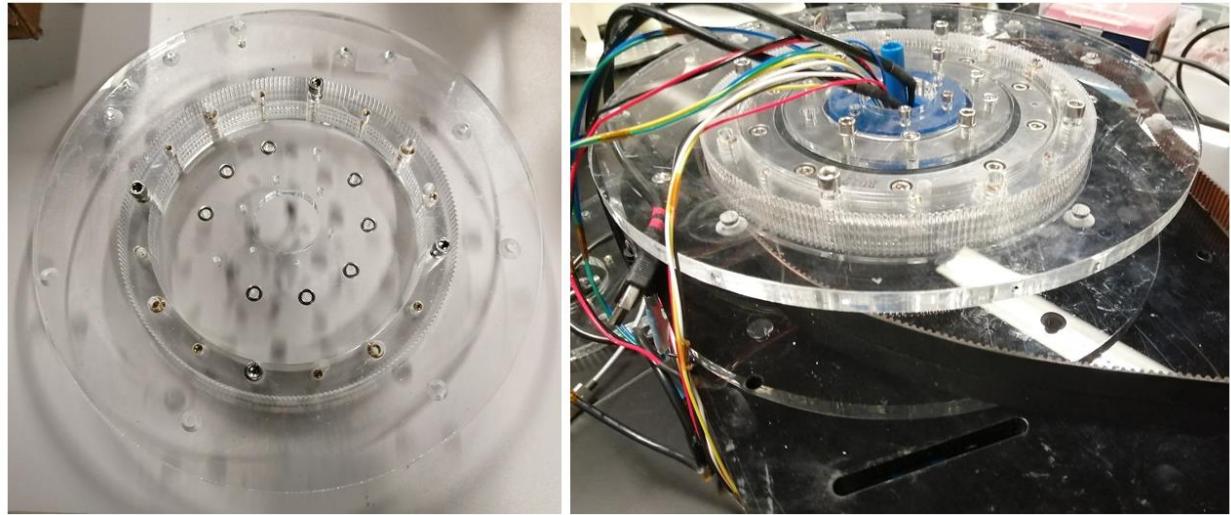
Assembly of the big pulley with the platform and both with the crossed roller bearing using M5 screws.
